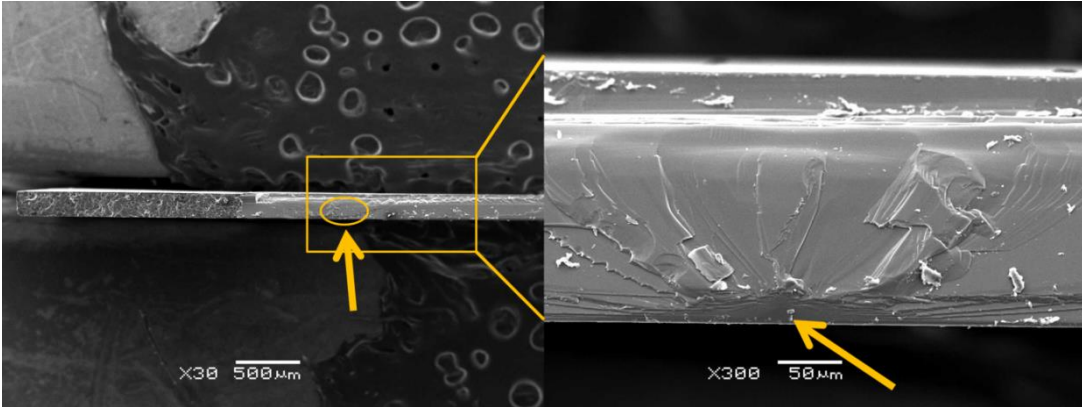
The initial fracture point appears on the silicon die surface of specimen A-2.
